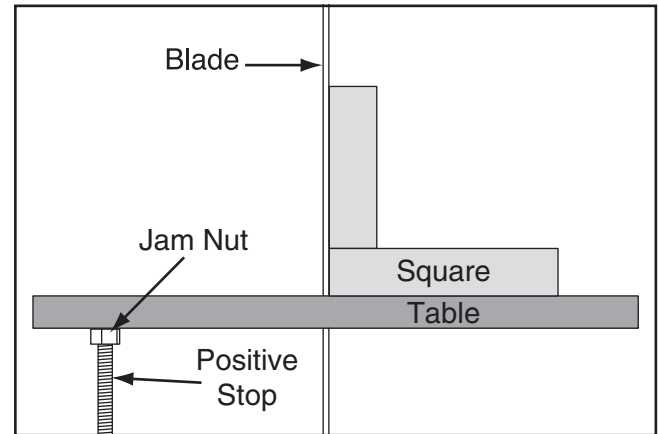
Using a square to adjust the table perpendicular to the side of the blade.
